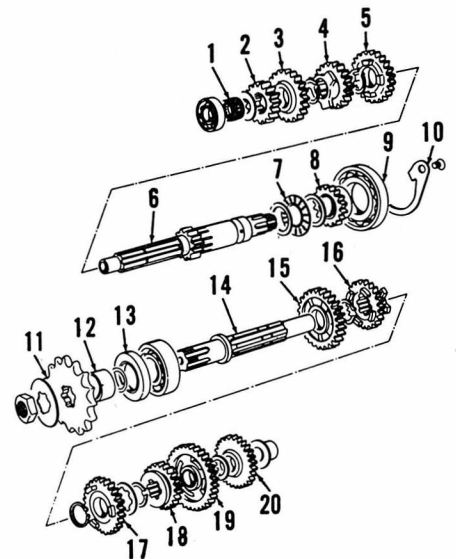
Exploded view of transmission used in TS 90 models.
